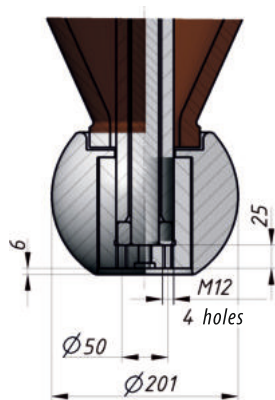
Bottom assembly of SF6 - Air gas-insulated bushing
